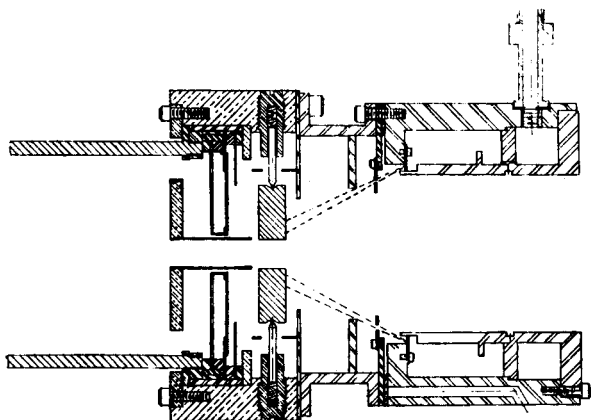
Drawing of Type I beam collimator and hot-plate assembly.
